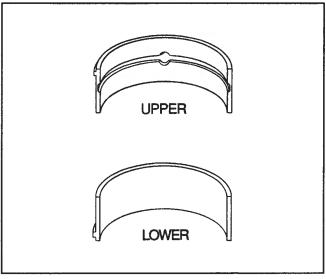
Identifying Upper And Lower Main Bearing Inserts
